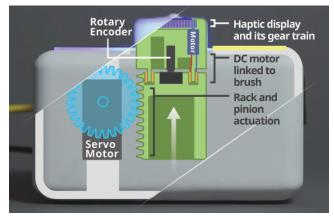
Rack and pinion actuation, brushing, and gearing required for the haptic display.
